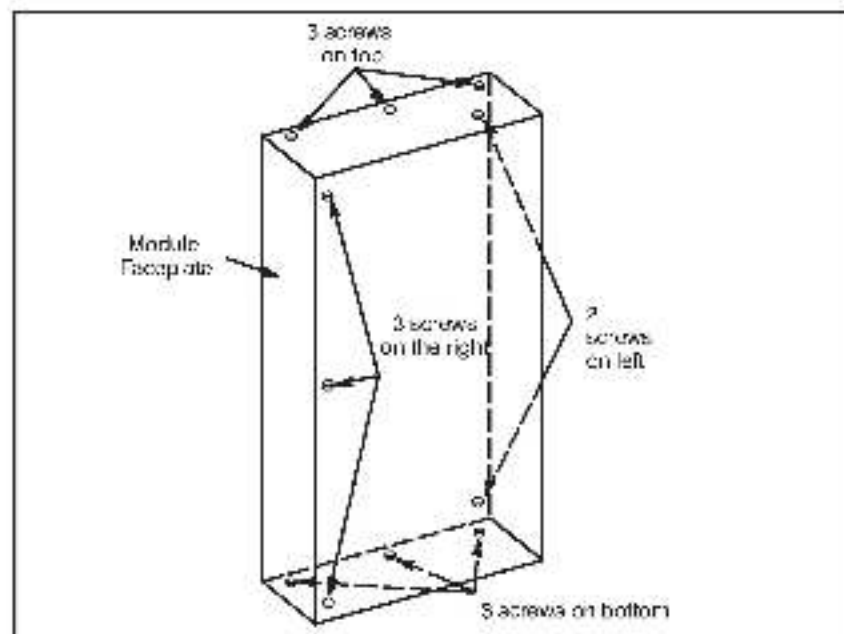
Disassembling the Module to Replace the 32mA Fuse
